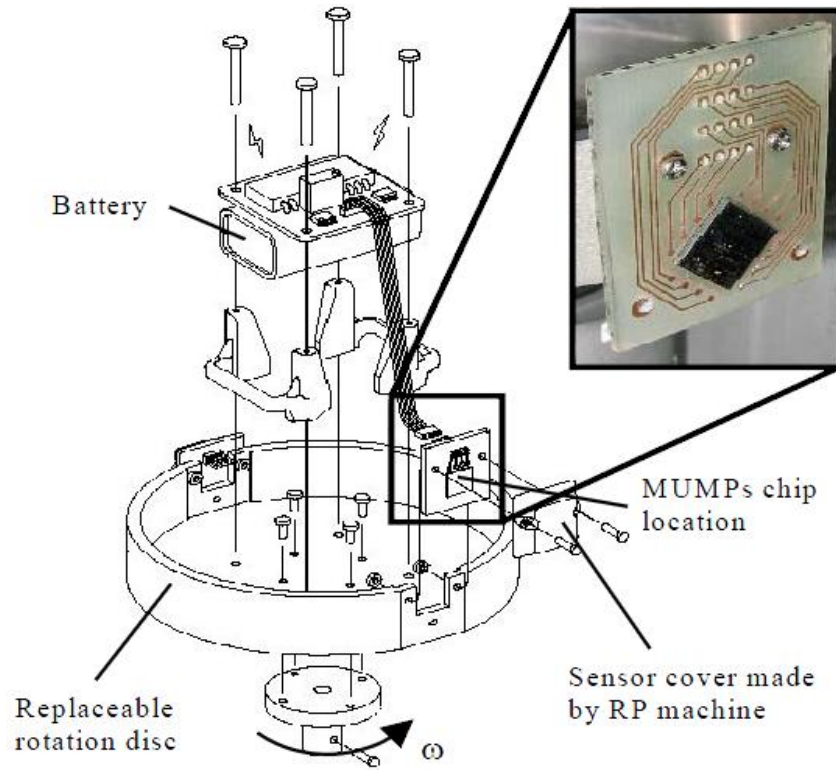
Conceptual drawing of the centrifugal assembling setup [20]
